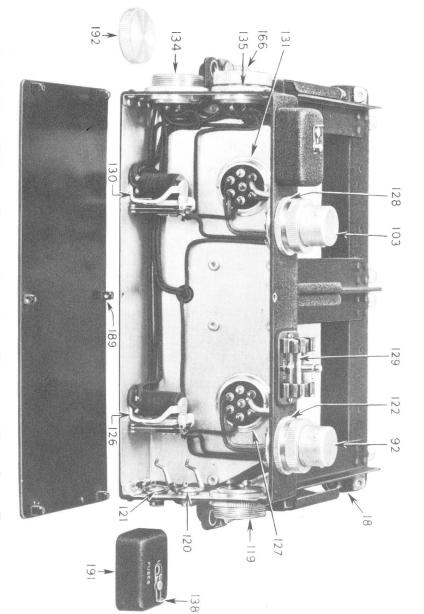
Type CBY-46096 RECEIVER RACK, REAR VIEW, WITH REAR COVER REMOVED
